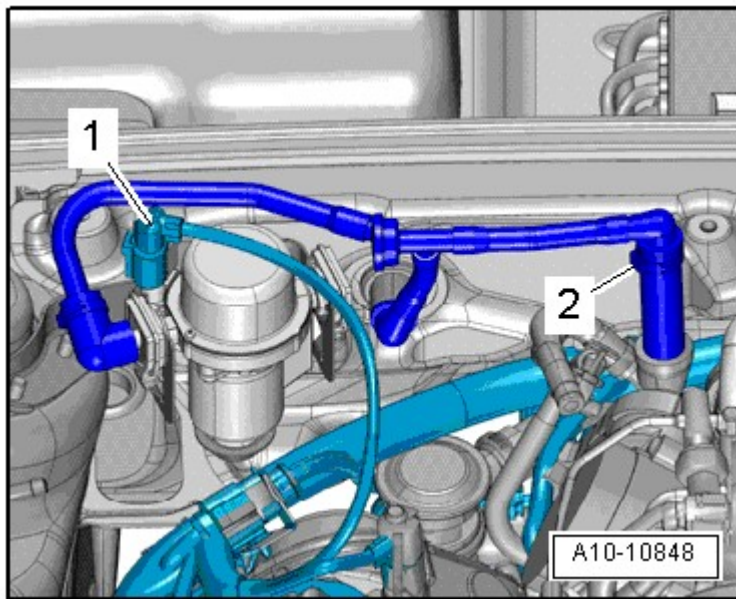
Identifying Electrical Connector -1- & Vacuum Hose -2-
